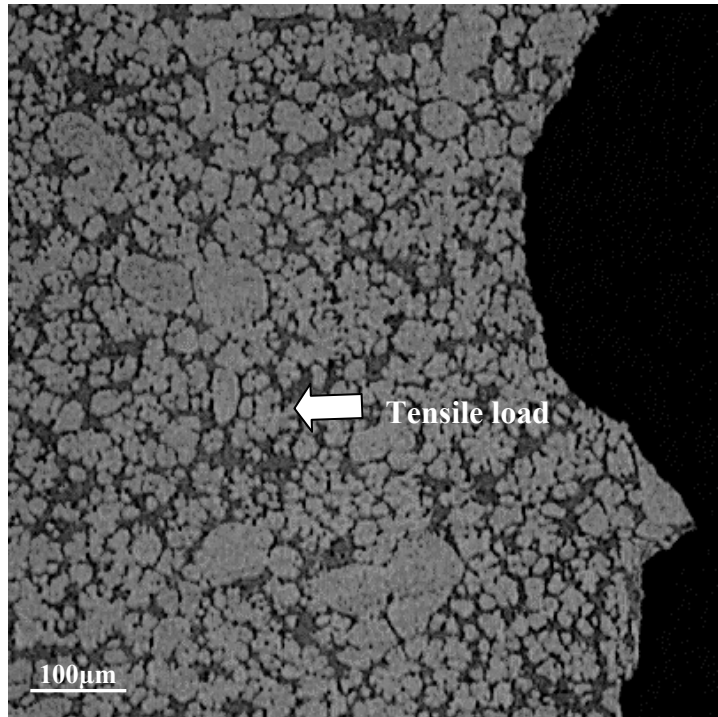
Optical Micrograph showing the longitudinal section of a fractured casting in as-cast Condition.
